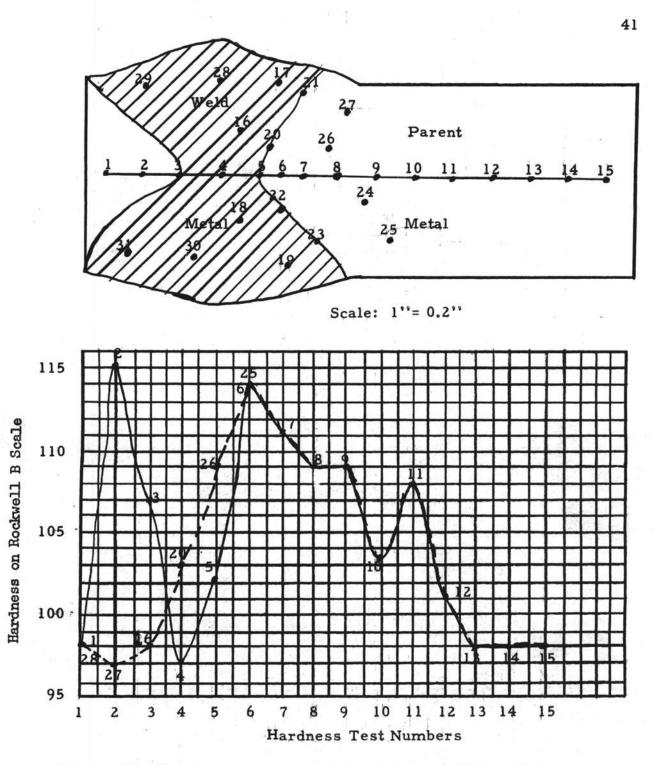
Hardness test on a non-preheated arc weld specimen.
